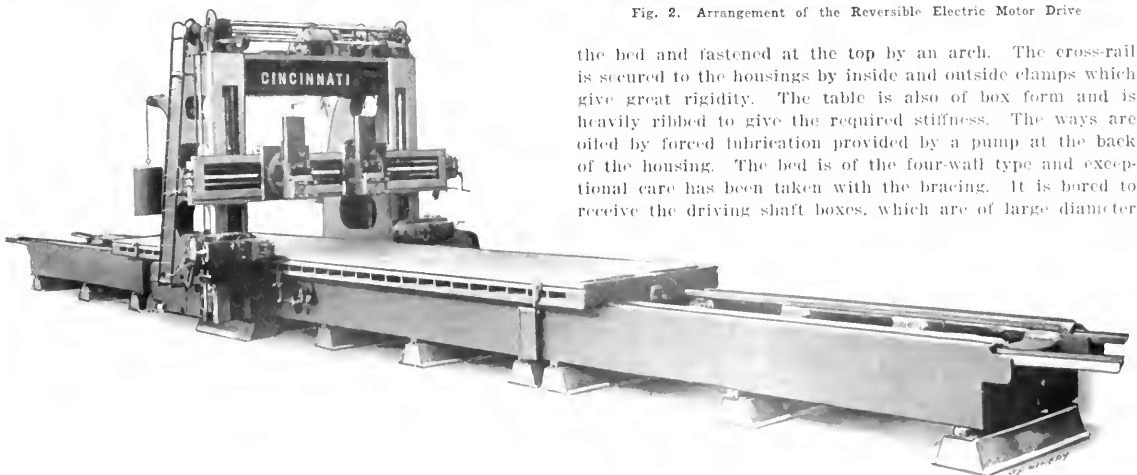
Cincinnati 84-inch Planer equipped with Reversible Motor Drive and a 34-foot Table
